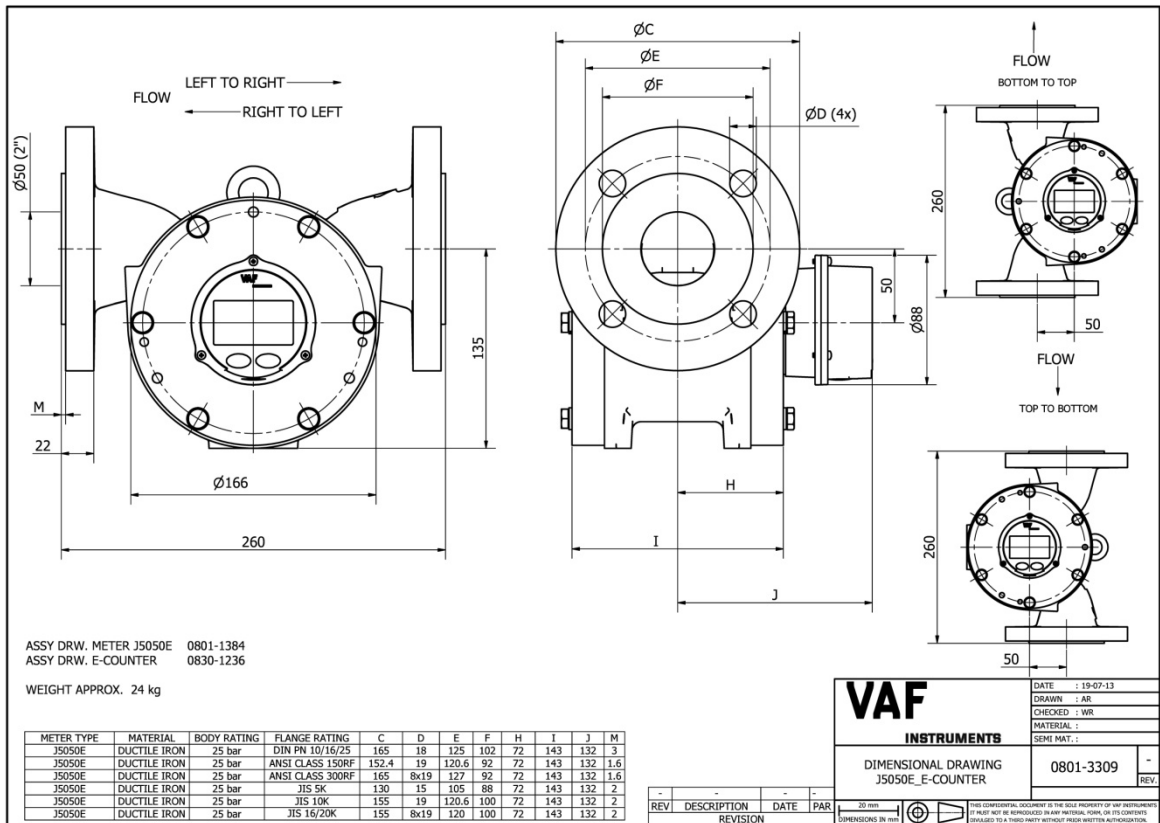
Drawing 0801-3309 – Dimensional drawing J5050E E-counter
